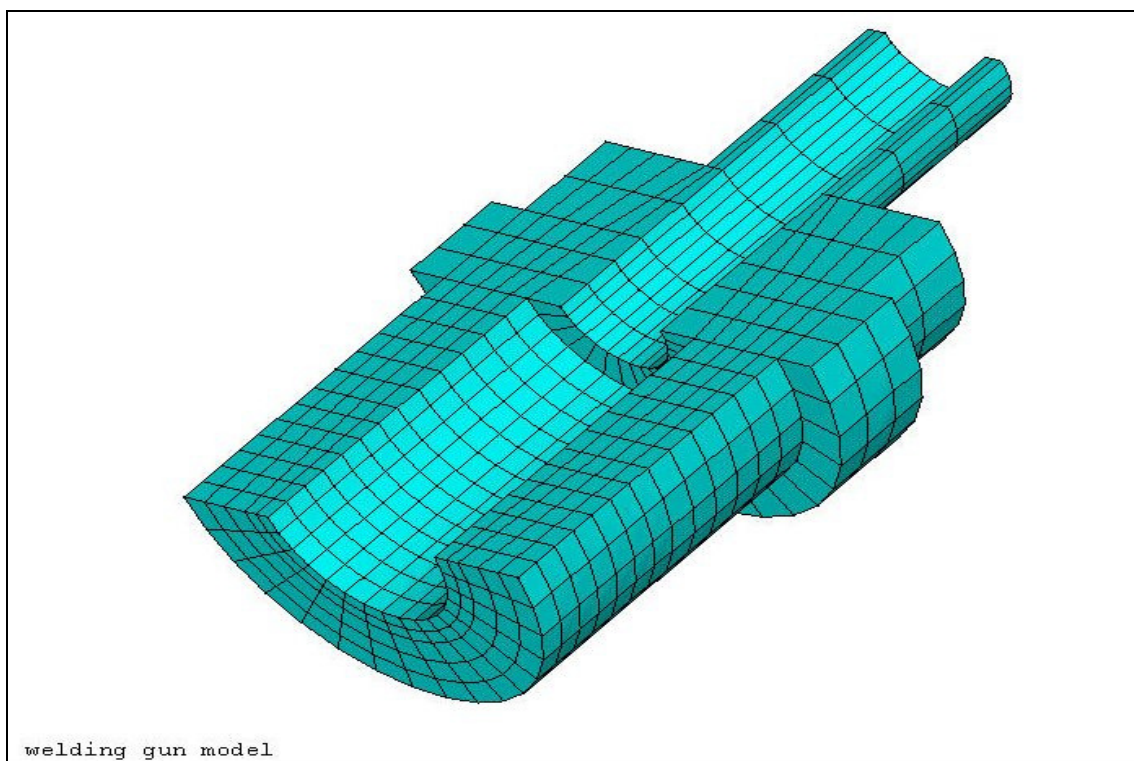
Meshing back cap of the welding torch model in Ansys.
